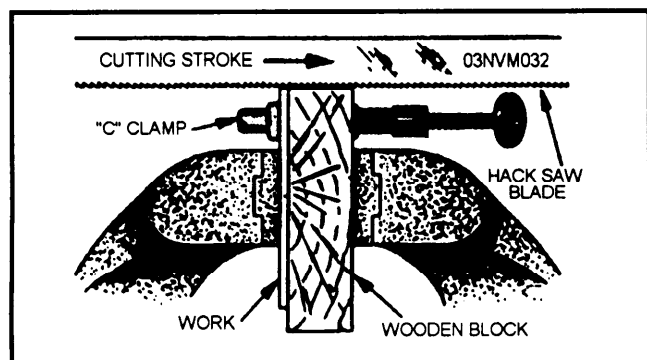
Cutting thin metal using wood block with layout lines.
